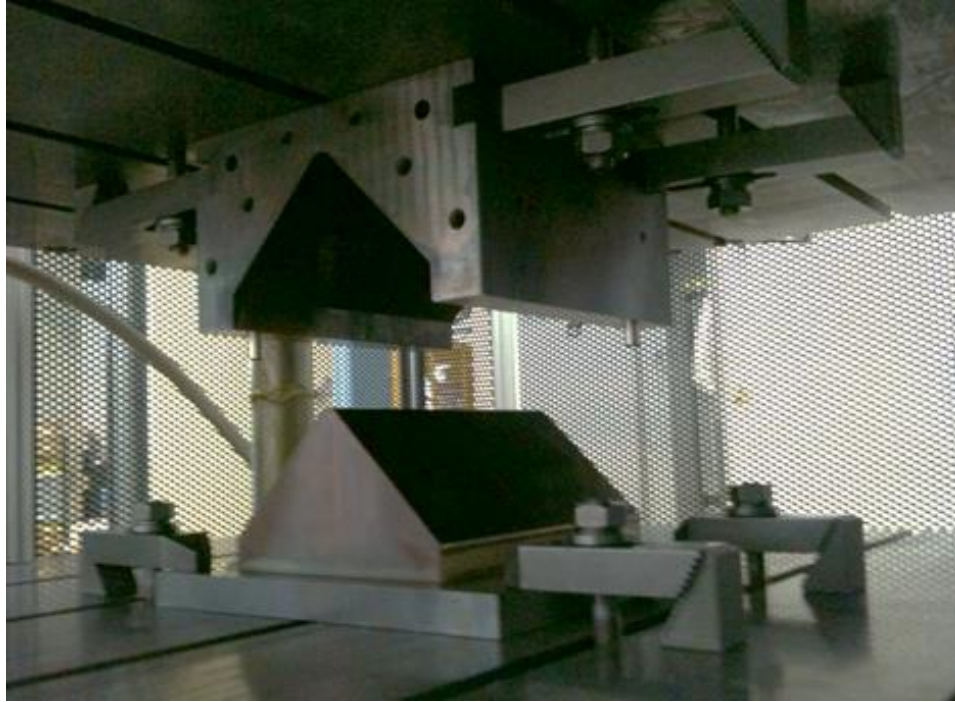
Male and female tool assembly (courtesy Fortin [128])
